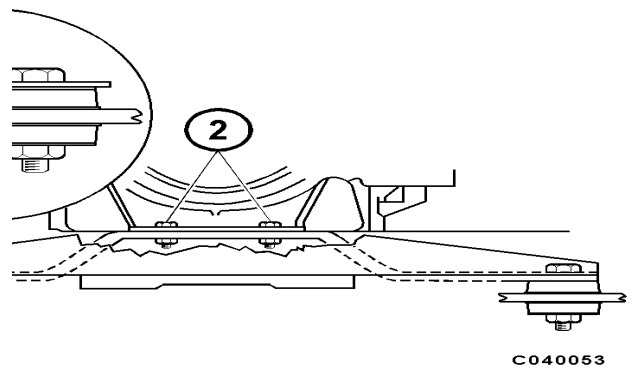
FRONT ENGINE CRADLE MOUNT
